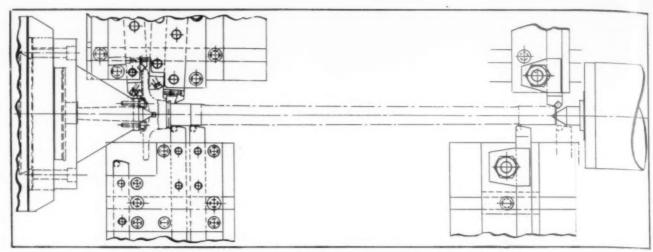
Machining automotive rear axle shaft on Snyder axle lathe, using Kennametal insert type tools.
